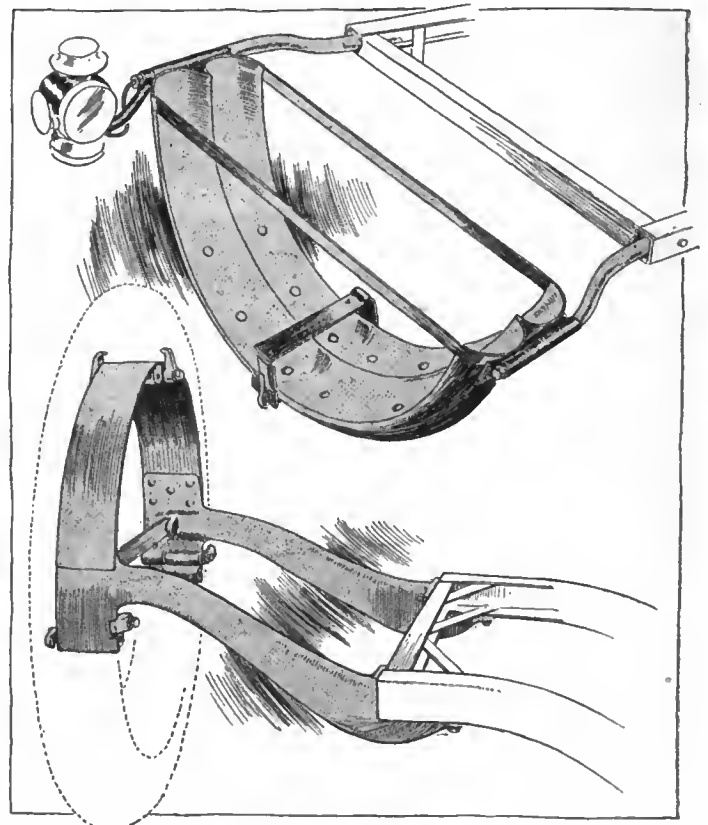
Above: Double-tire carrier at rear of Oldsmobile, supported on tubular brackets and provided with a means of locking in the spares. Below: Rear carrier on Haver Six, which supports spare by clamping on rim. The brackets are made to form a continuation of the chassis lines
